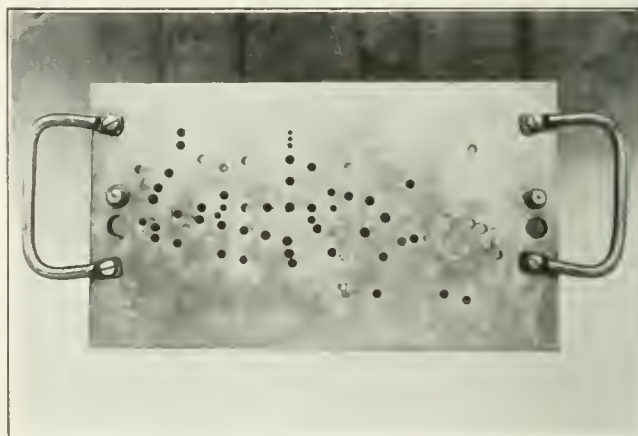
Master Plate for All the Holes in Both Right- and Left-hand Side Frames—Holes Common to Both Frames are bored through
